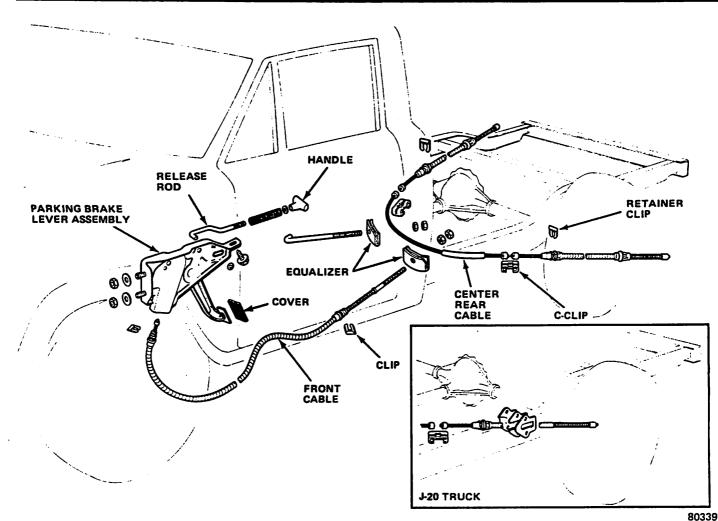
G-4 Parking Brake Assembly-Cherokee-Wagoneer-Truck Models
